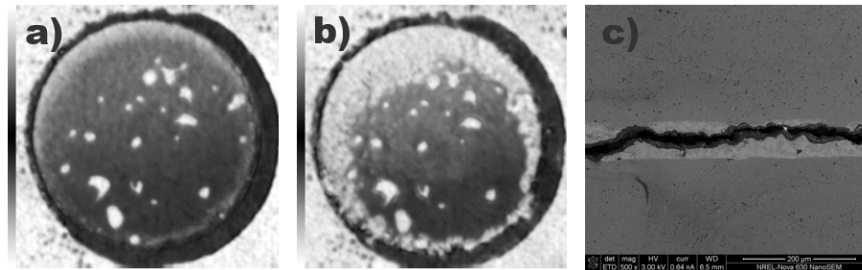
C-SAM image of a SnBi solder joint after a) 1000 thermal cycles (TC) and b) 3900TC; c) SEM cross-section of a separate joint demonstrating cohesive cracking through the solder layer.
